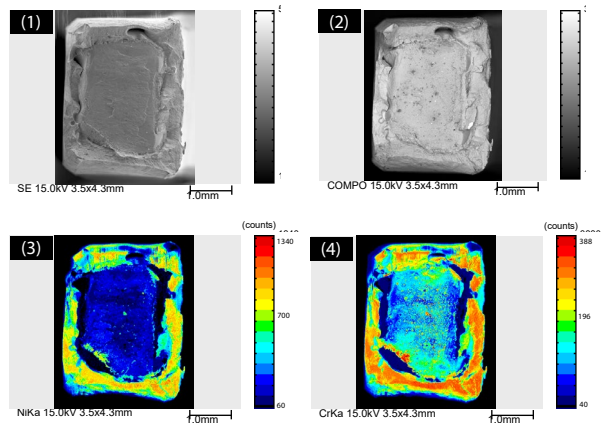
Observation Images of Test Specimen A Fracture Surface (SS400 Side)
